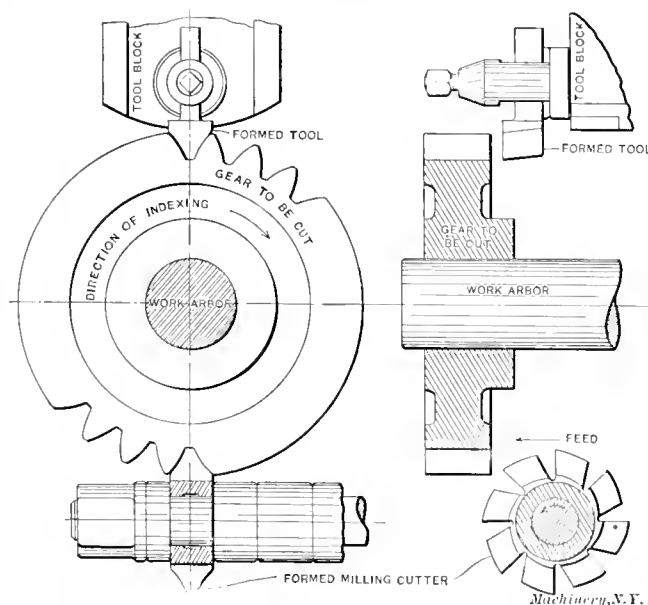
The Formed Tool Principle of Action as exemplified by the Shaper Tool and the Milling Cutter.
